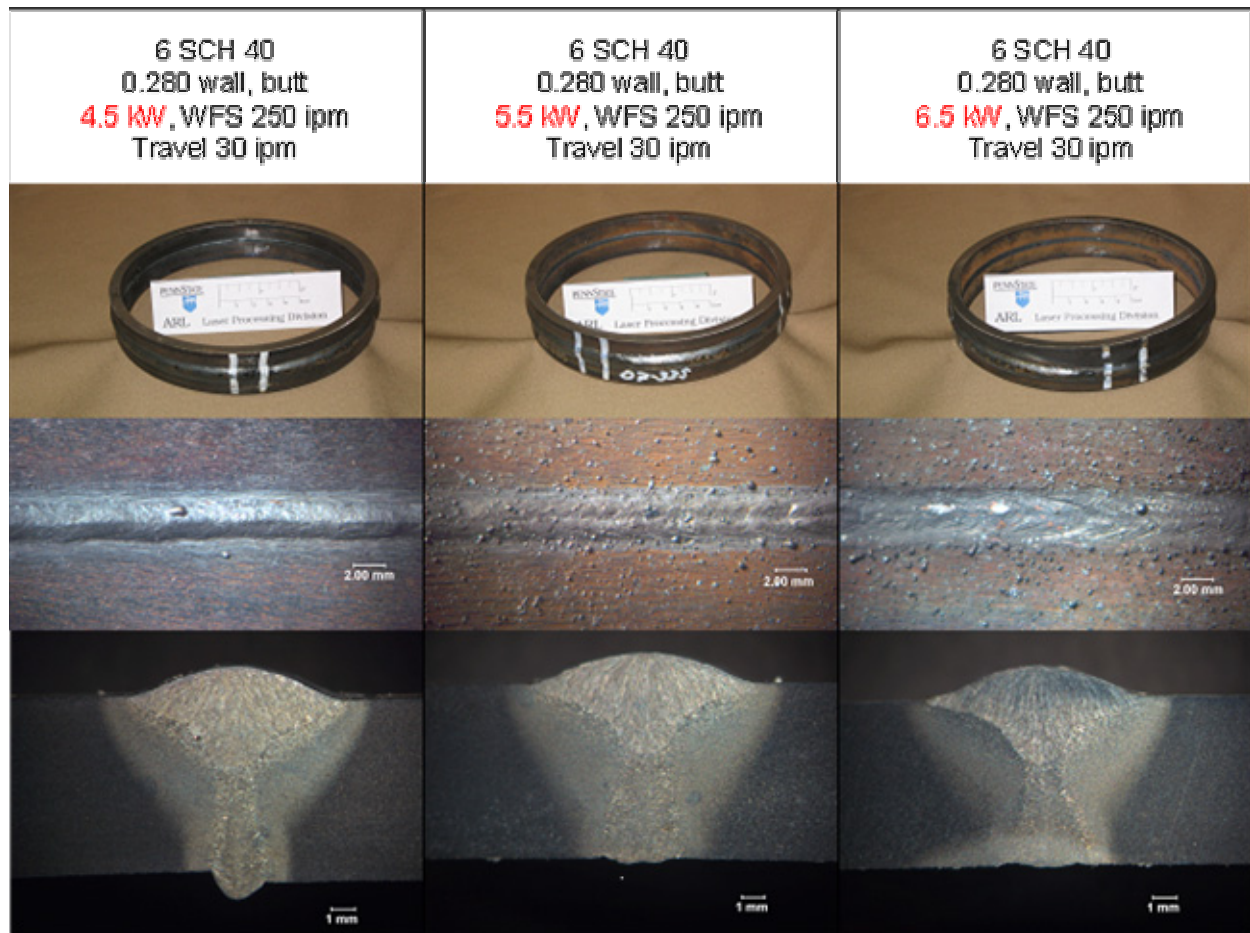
Investigation of varying laser power. The welded pipe is shown, with close-ups of the rootside reinforcement and macro sections.
